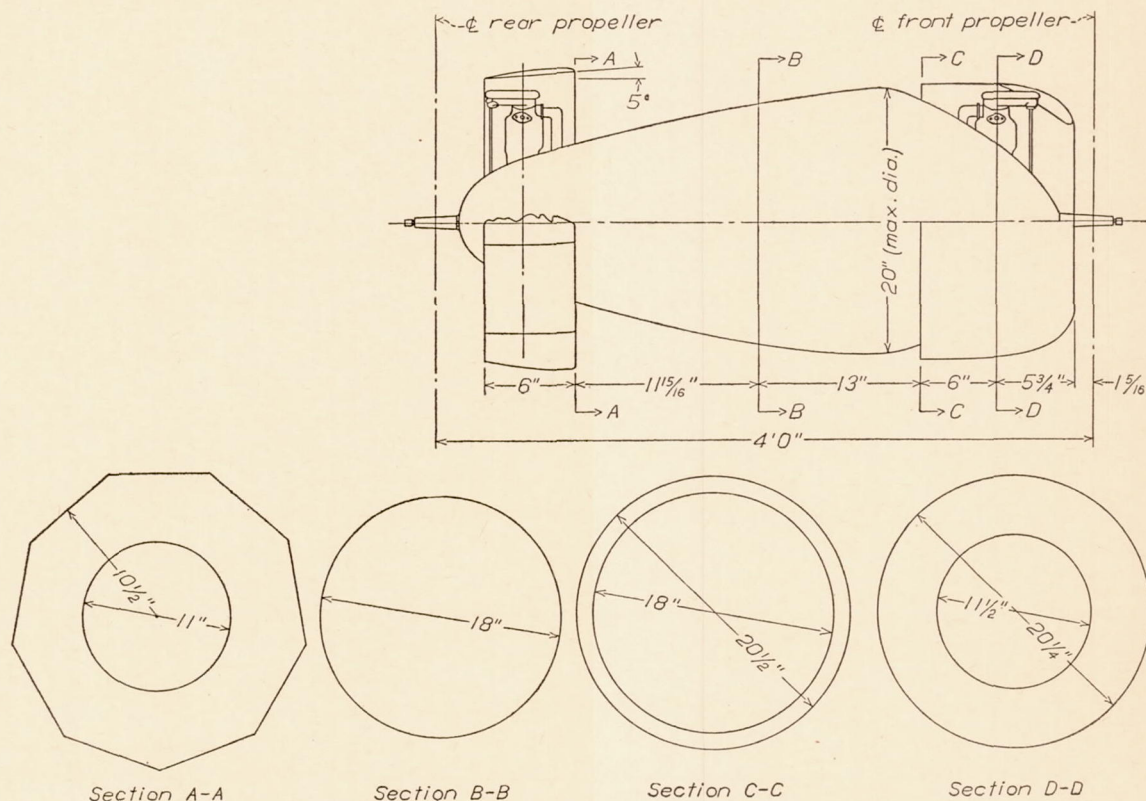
Large nacelle and engine assembly, propeller spacing 1 diameter.
